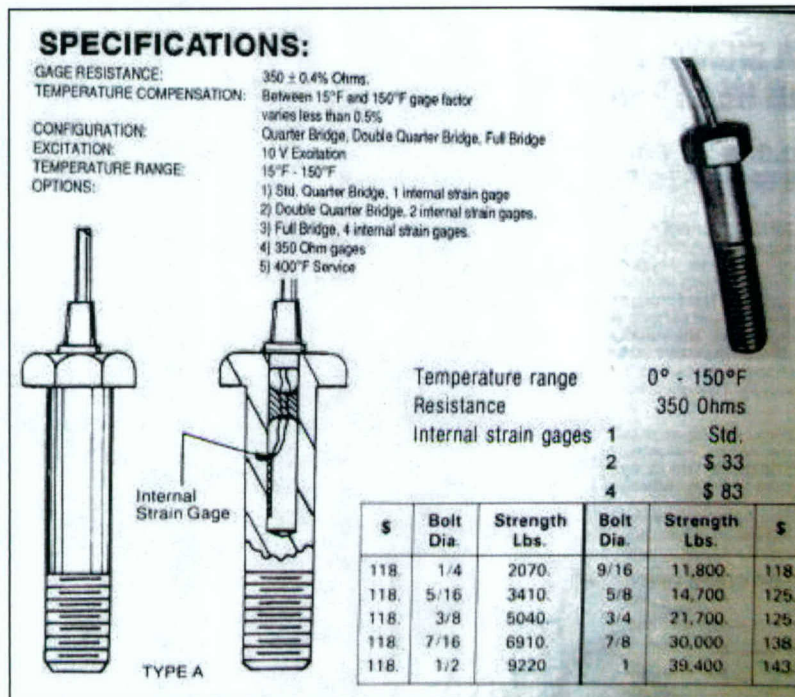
Internally Gaged Bolts Spec. Sheet (aldesigninc.com)
